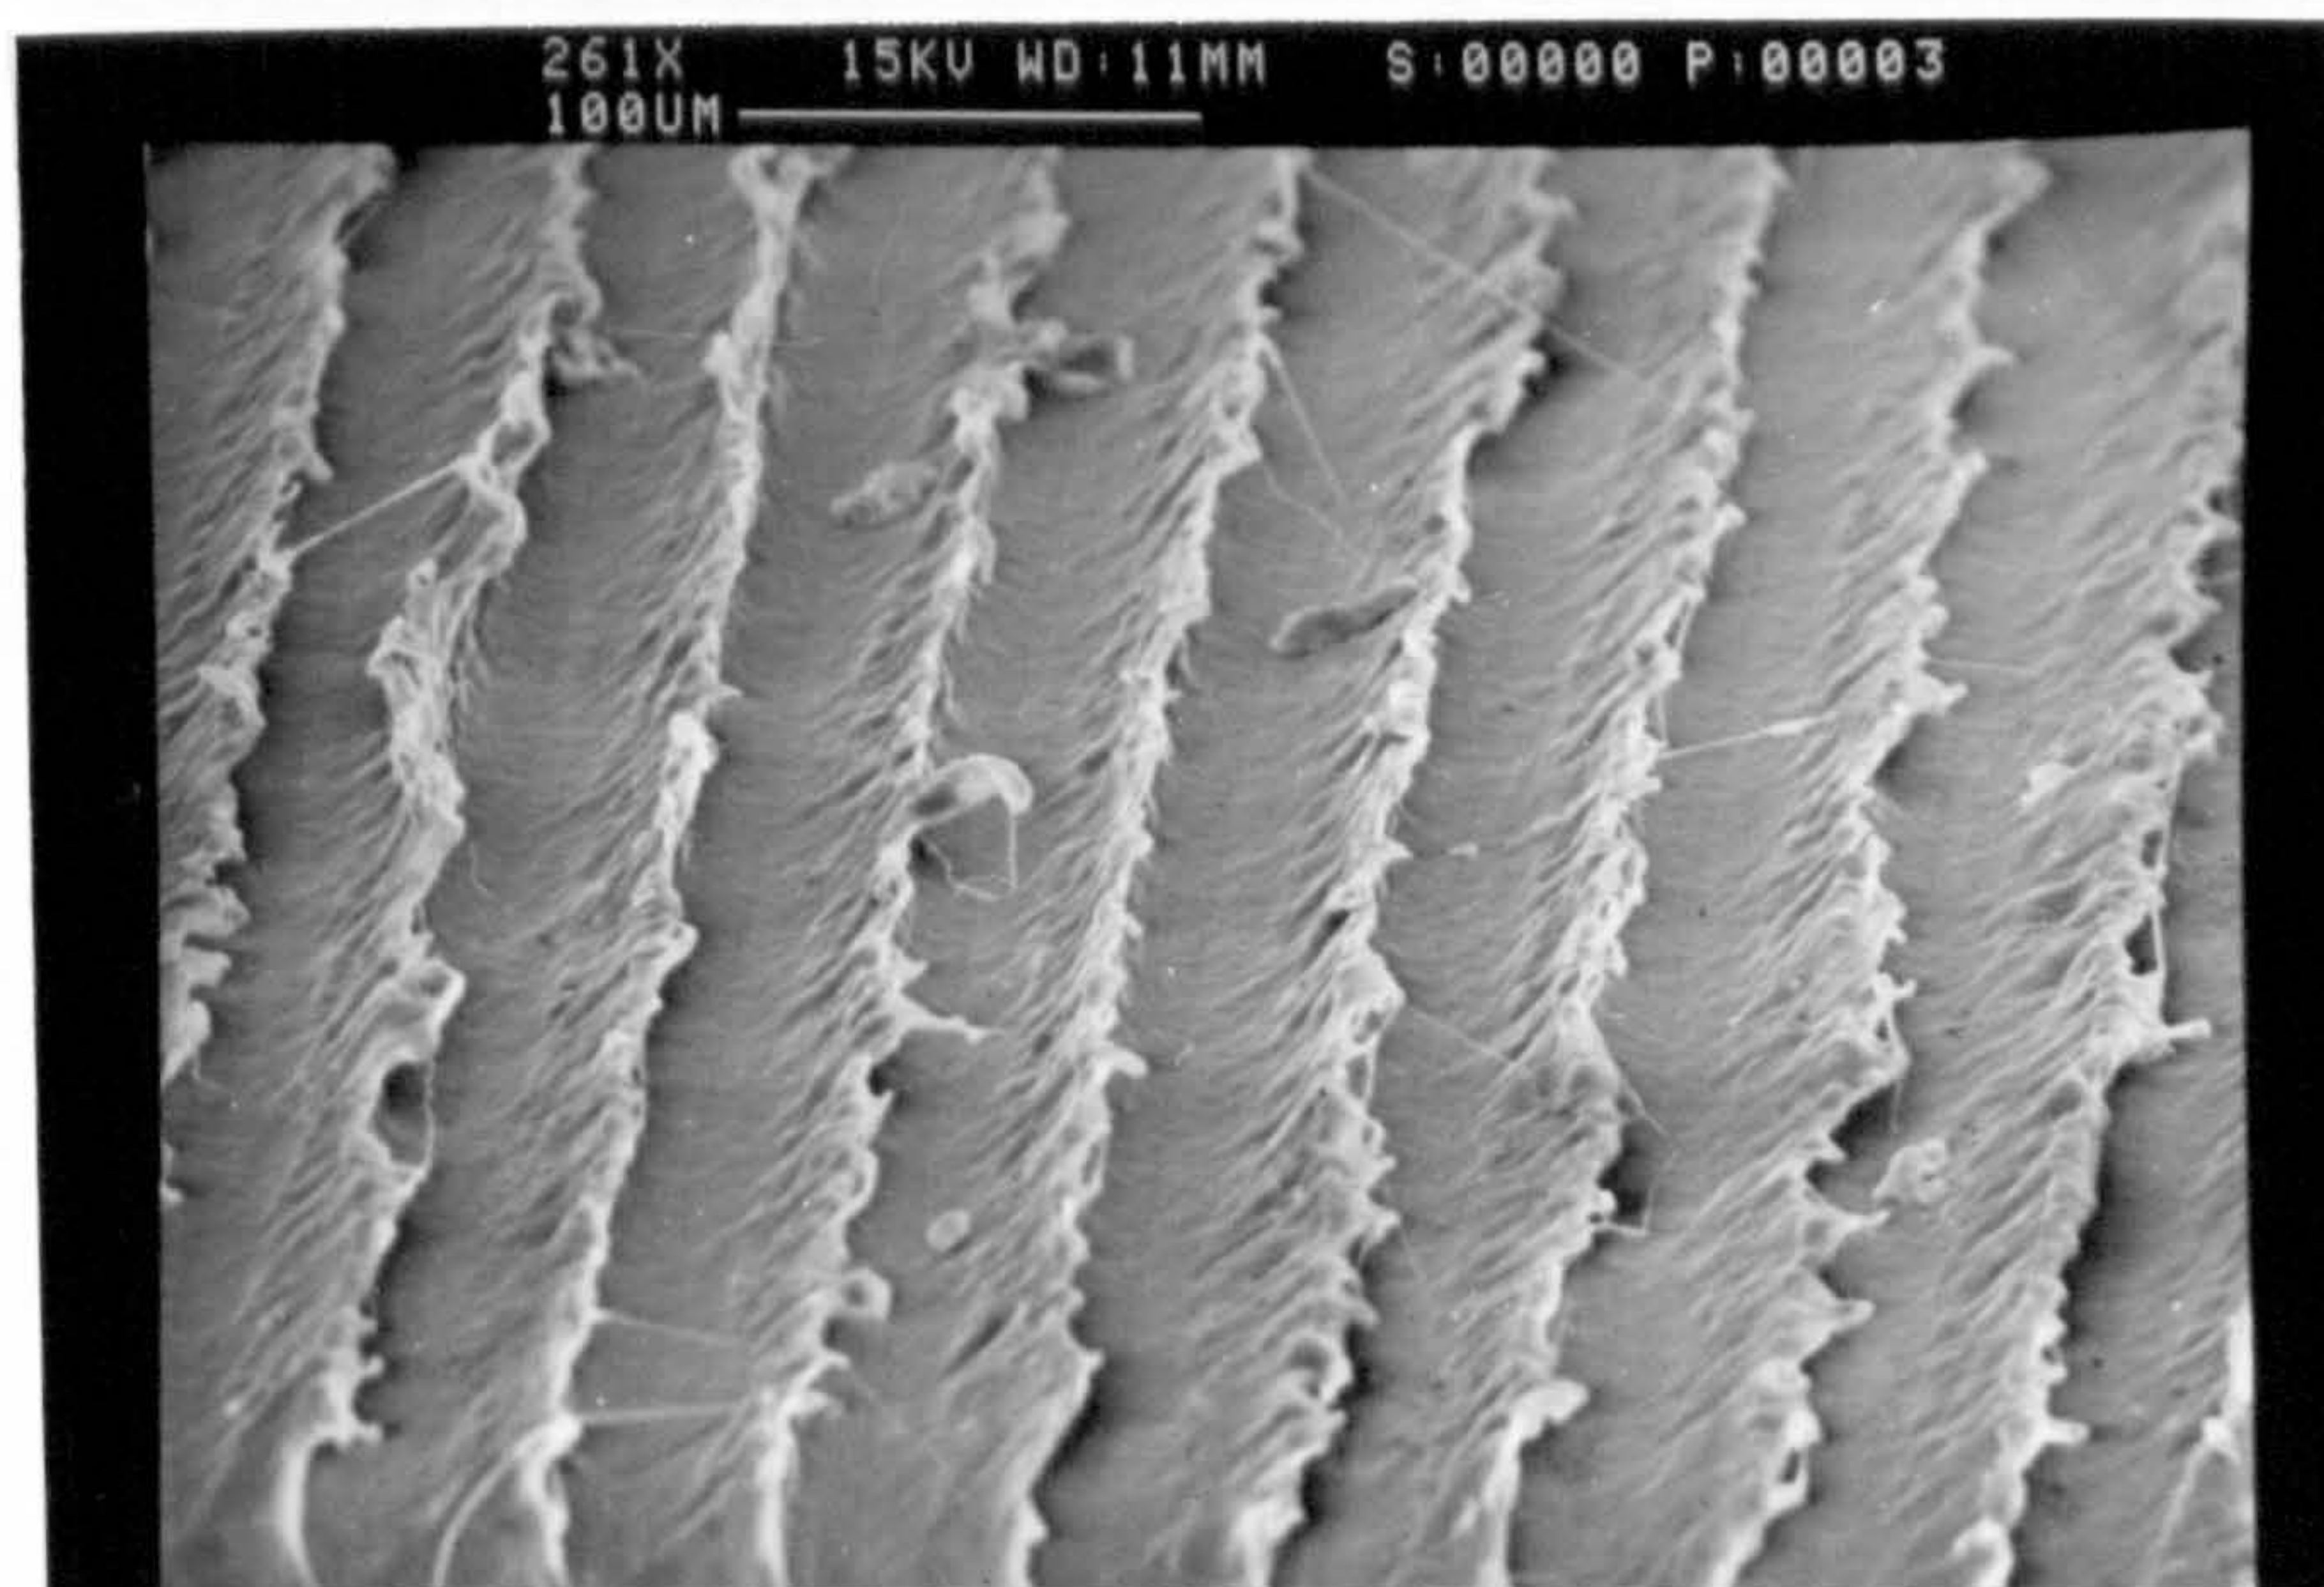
HDPE surface machined at low feed rate (0.05 mm/rev), showing ductile nature. (Rake angle =  $10^\circ$ , speed = 250 m/min)
